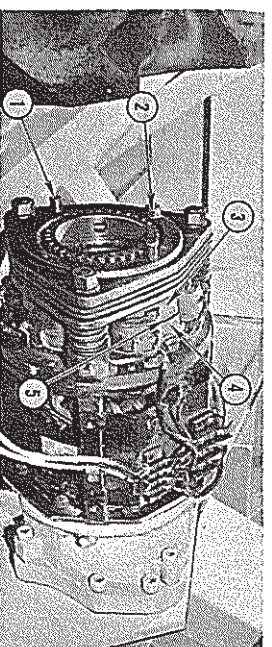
MOTOR BRAKE ADJUSTMENT
